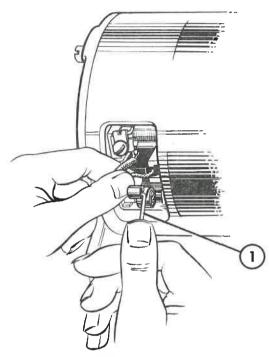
Engaging the brushes on the commutator (Bandcover type dynamos) 1 Brush spring hooking tool (see Fig. 10)
